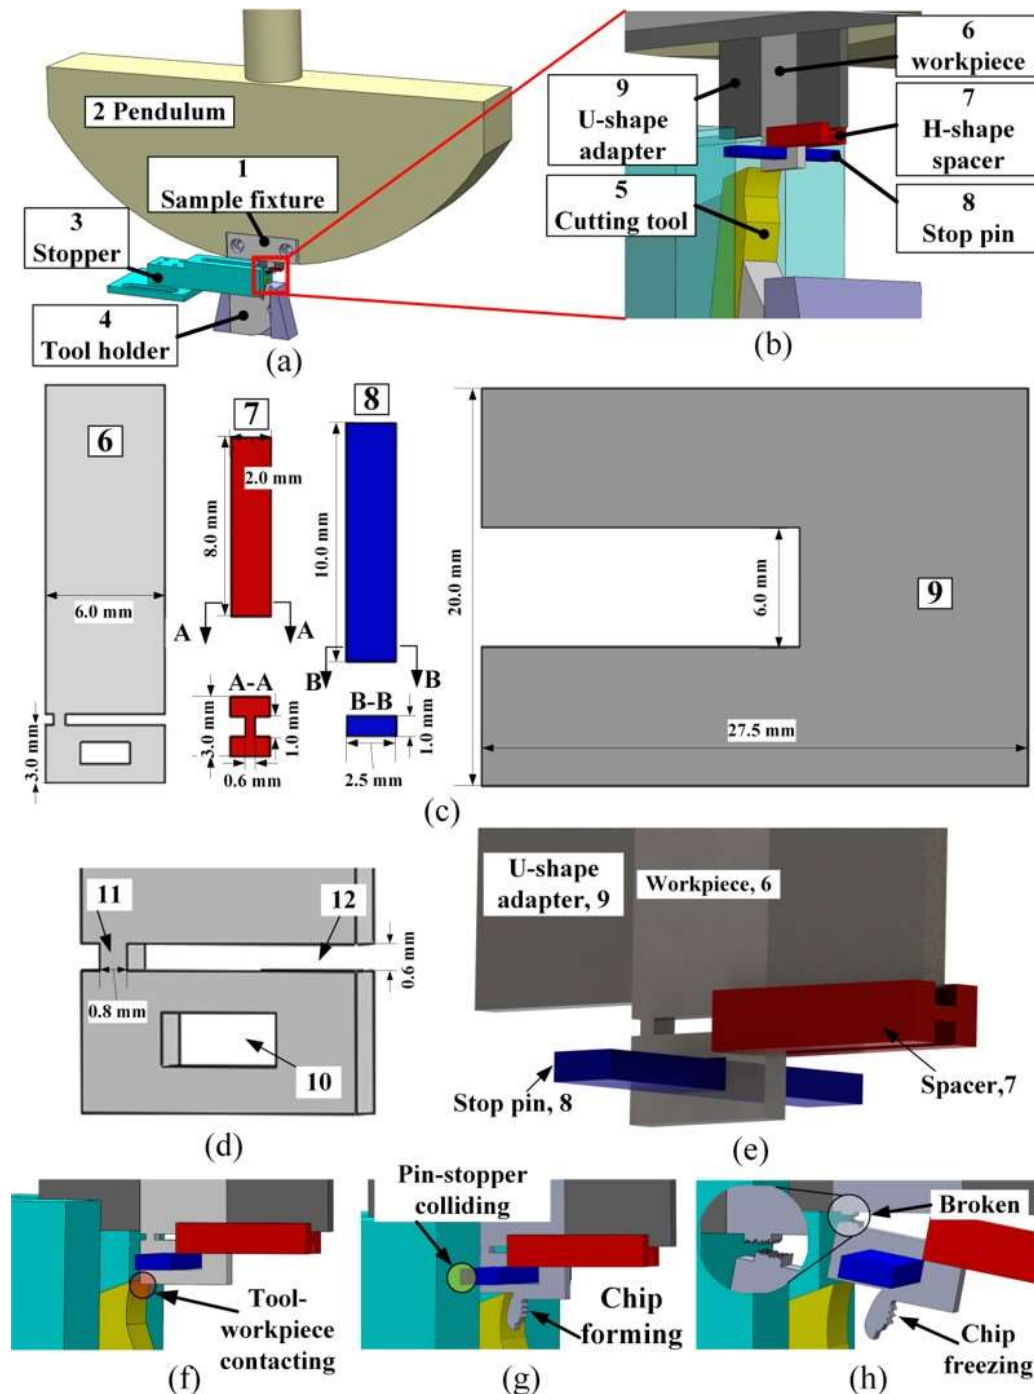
Quick-stop module and cutting process schematics. (a) and (b) are schematics of pendulum-based cutting machine, quick-stop module and the cutting tool; (c) and (d) are components for quick-stop cutting test, including spacer, stop pin, sample and U-shape adapter; (e) schematic of assembled components; (f), (g) and (h) schematics of the quick-stop cutting test. (1. Sample fixture, 2. Pendulum, 3. Stopper, 4. Tool holder, 5. Cutting tool, 6. Workpiece, 7. H-shape spacer, 8. Stop pin, 9. U-shape adapter, 10. Slot, 11. Weak joint, 12. Groove)
